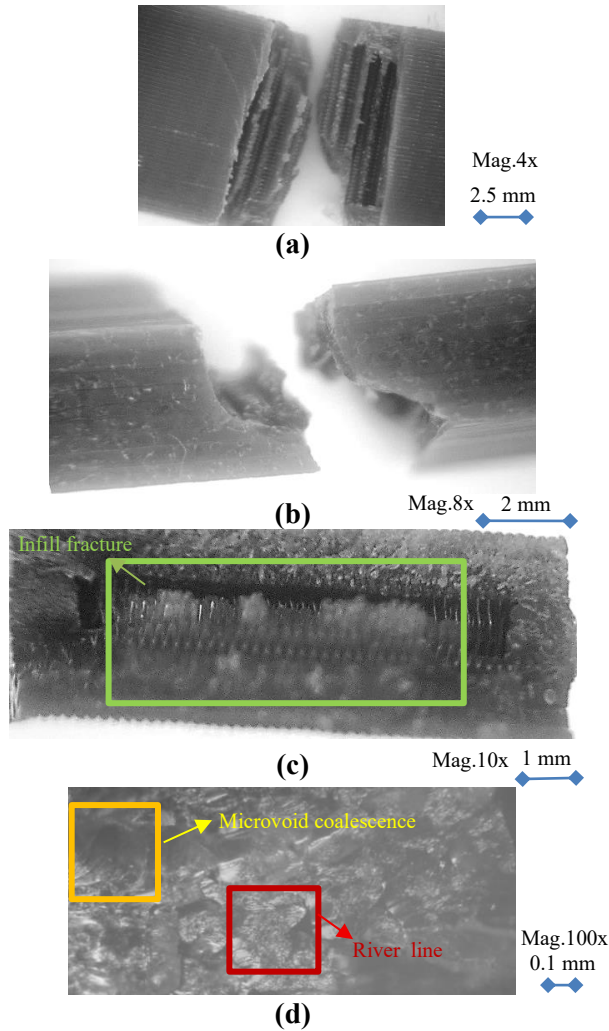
Fracture surface morphology of the highest impact strength specimen.
